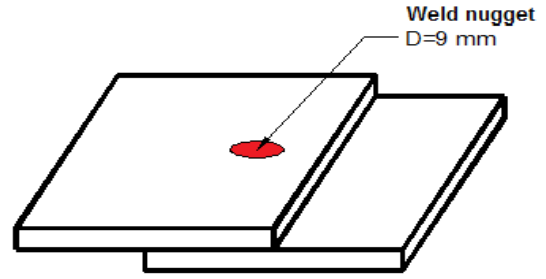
Standard welding specimens with specified welding zone.
